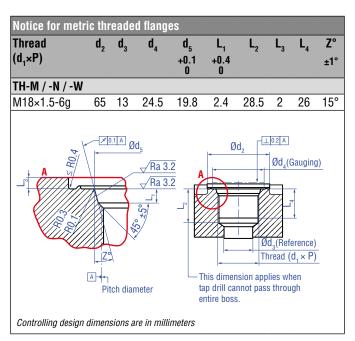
Notice for metric threaded flange M18×1.5-6g based on DIN ISO 6149-1
